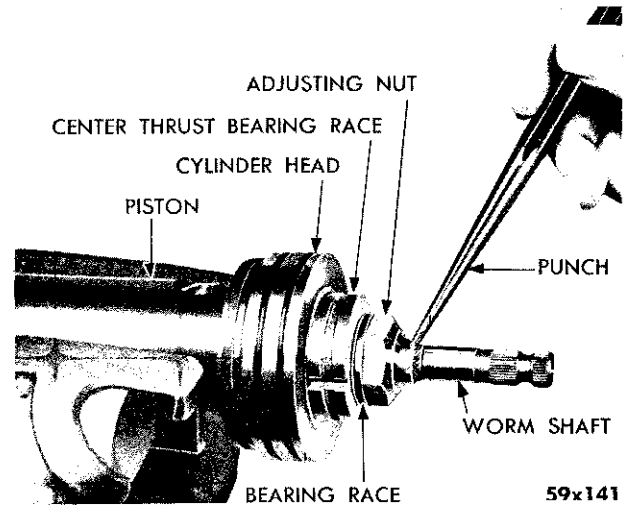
Staking Worm Shaft Bearing Adjusting Nut
